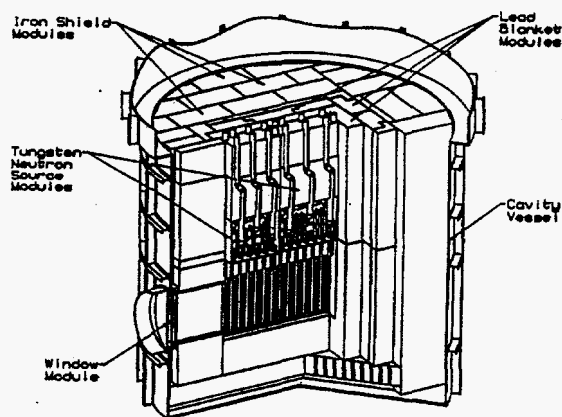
Schematic cross section of an APT target and blanket assembly. One half of the blanket assembly has been removed for clarity.
